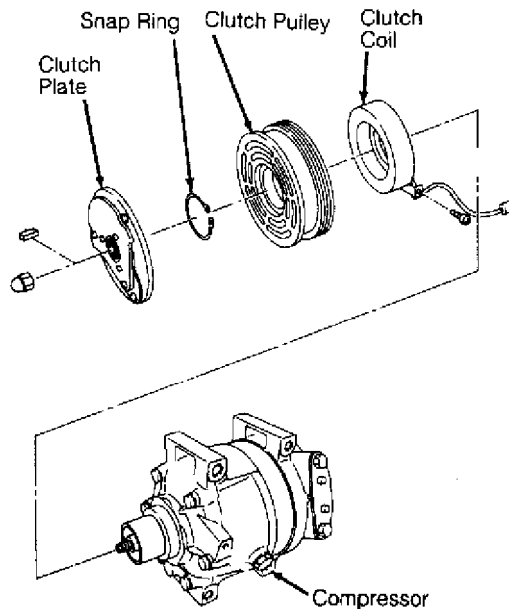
Exploded View Of Compressor Clutch (Calsonic V5)
